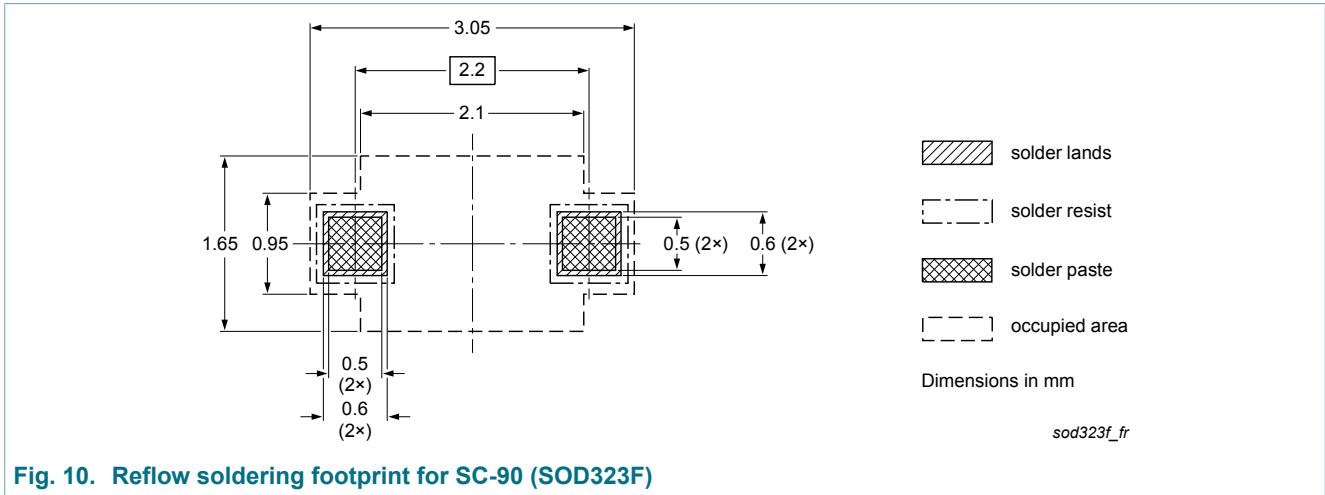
Reflow soldering footprint for SC-90 (SOD323F)
